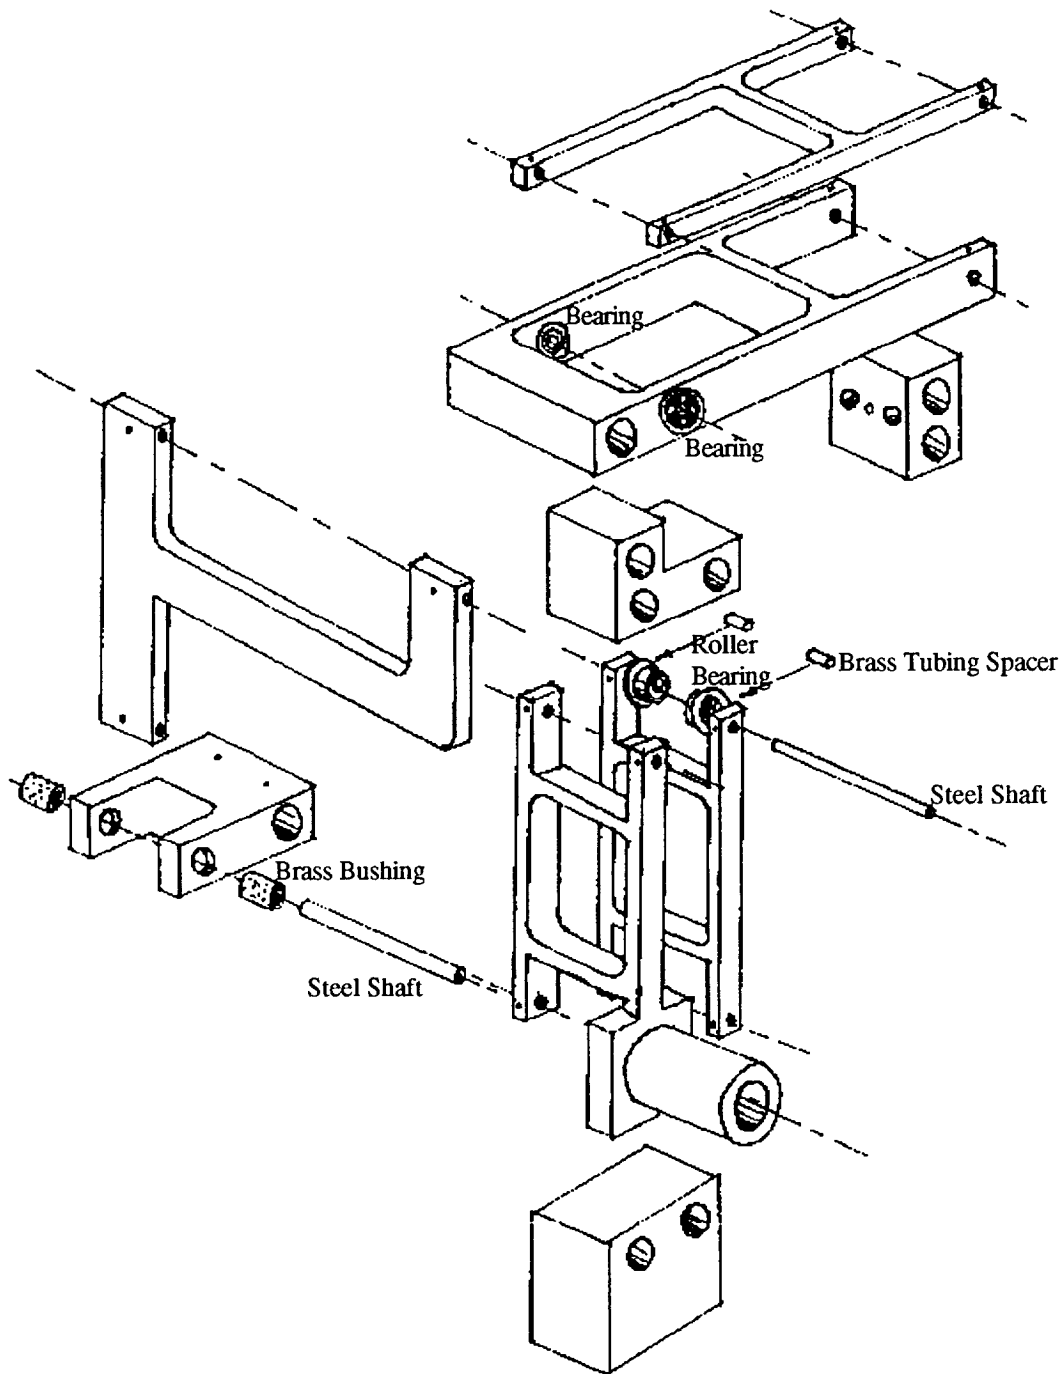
Simple assembly drawing of the tactile stimulator.
